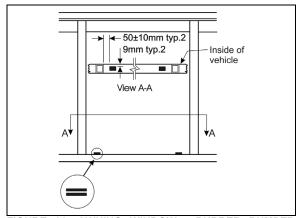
AWNING WINDOW - RUBBER BUMPER INSTALLATION
